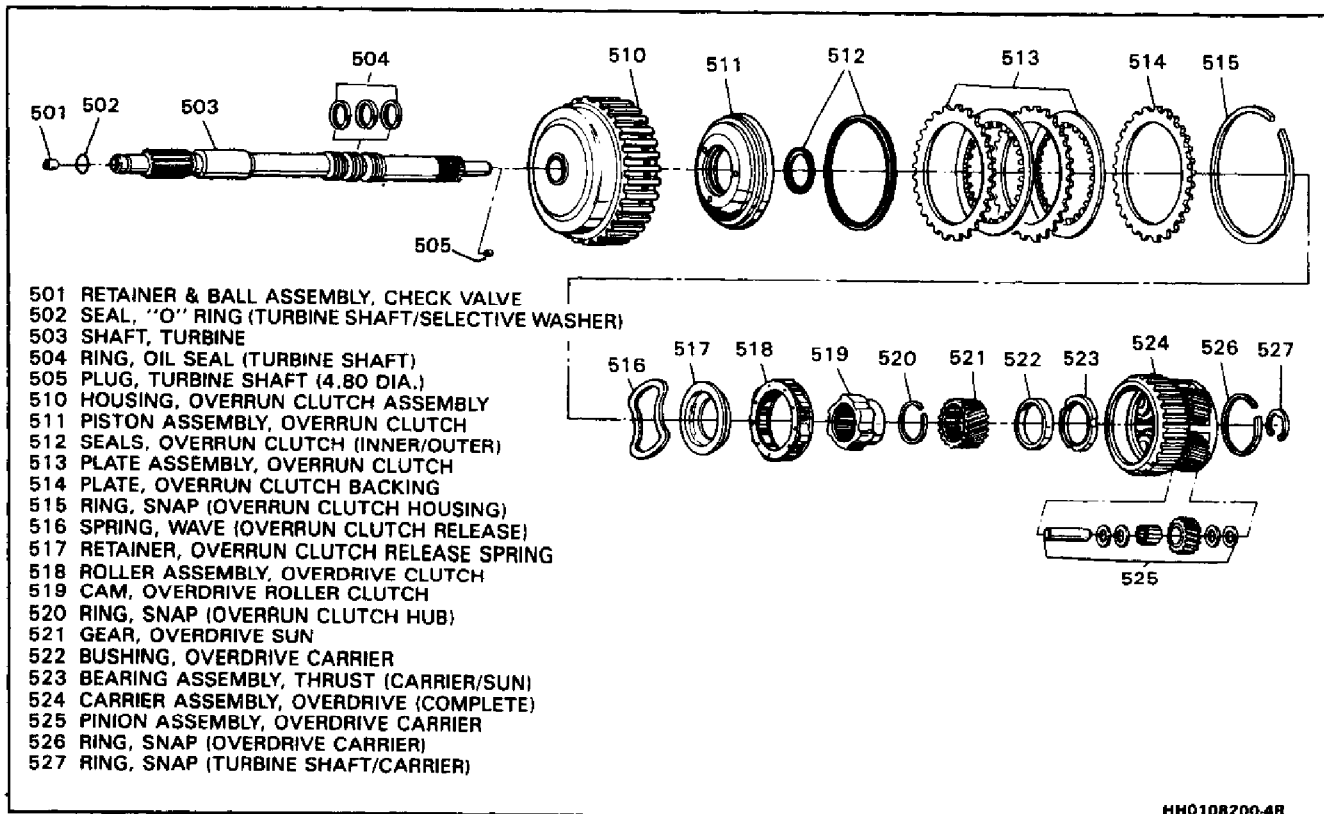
Turbine Shaft, Overrun Clutch and Overdrive Carrier Assemblies
